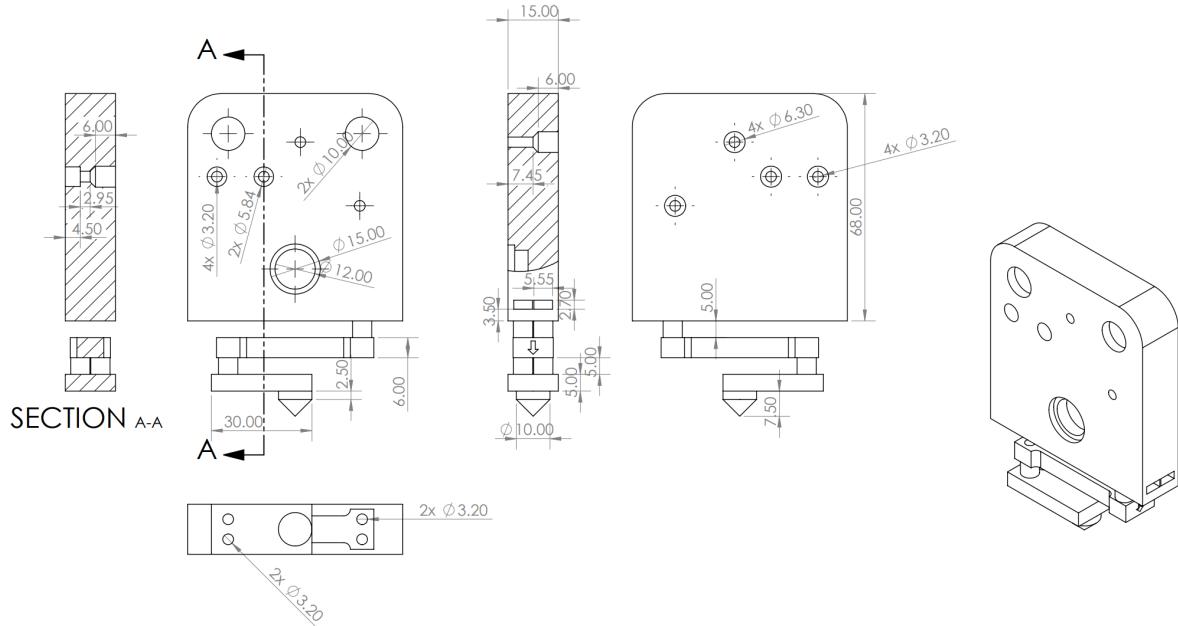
Load Cell Mount & Button Presser Dimensions for 3D printer attachment.
